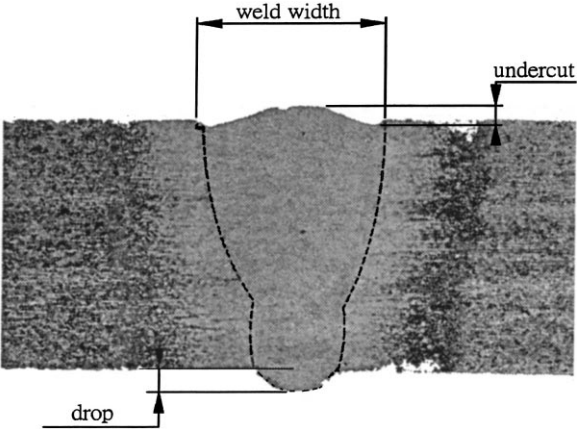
Typical cross-sectional view of laser welding.
